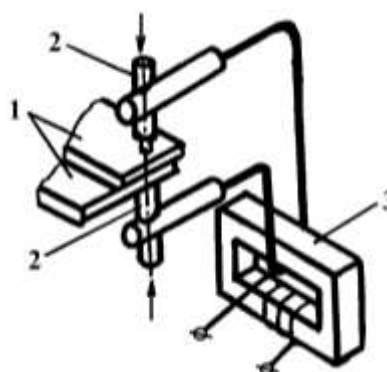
Spot welding: 1 – work pieces; 2 – electrodes; 3 – transformer; P – pressure
